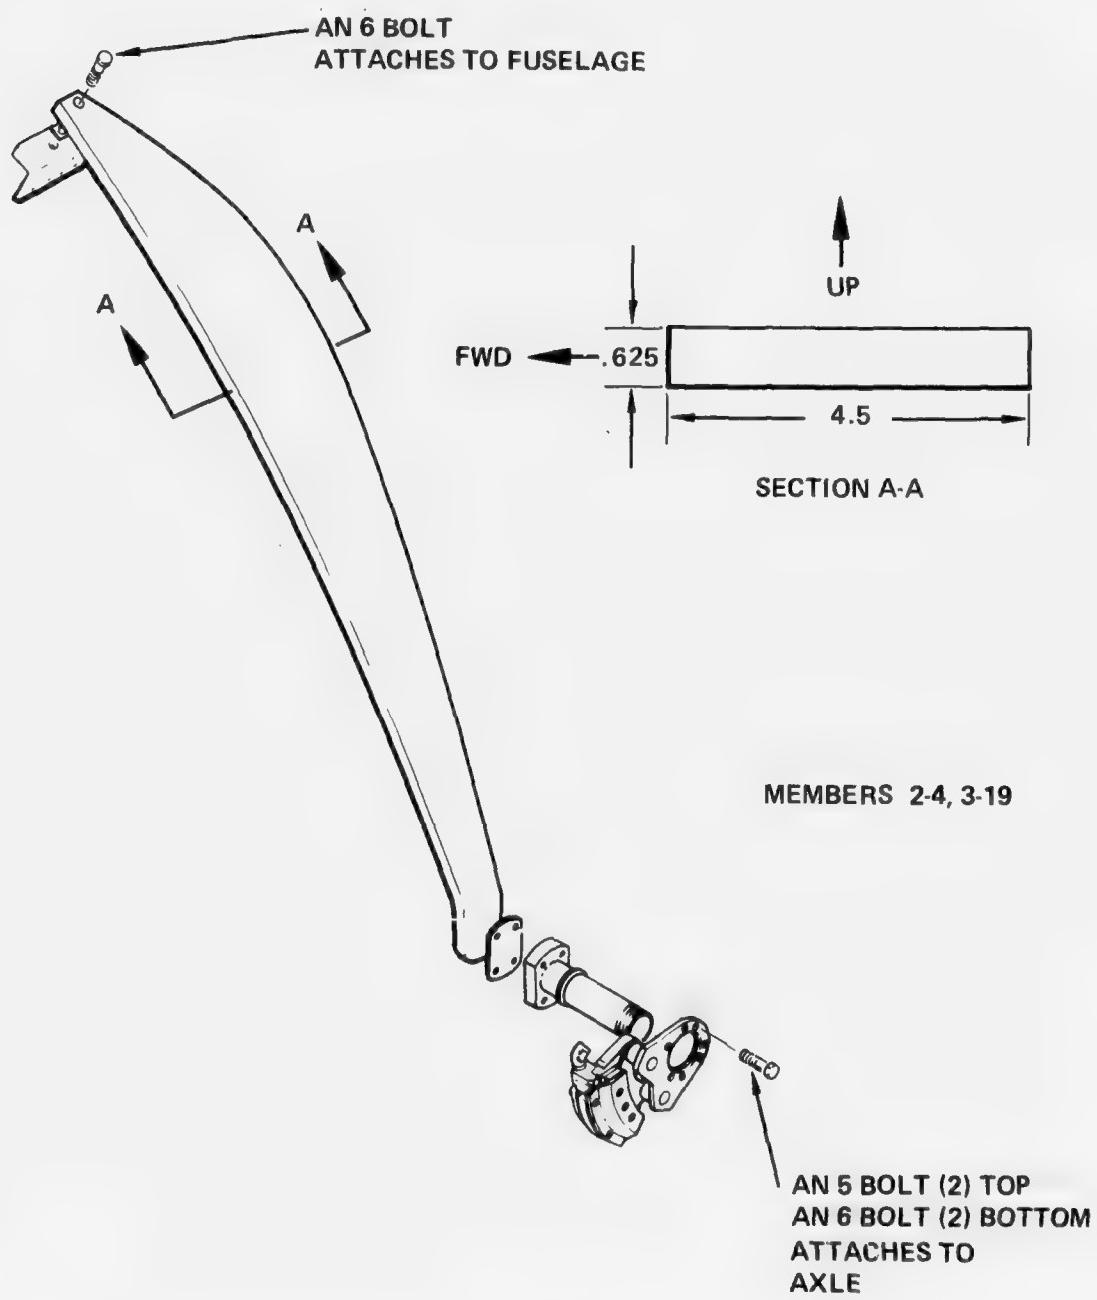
Main Landing Gear Cantilever Spring Cross-Section
